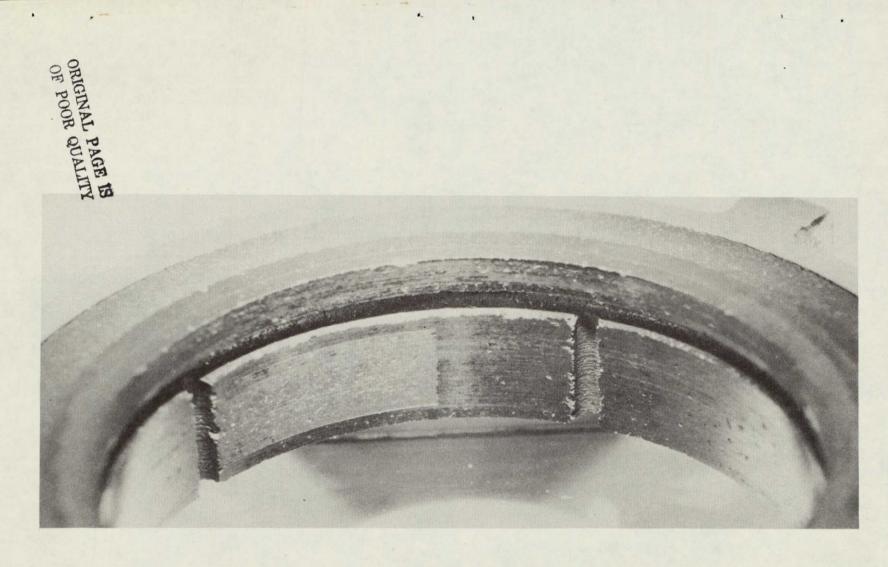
Helium Seal LOX Side Seal Ring (RS009690X, S/N 05, Build 14, Posttest 749)
